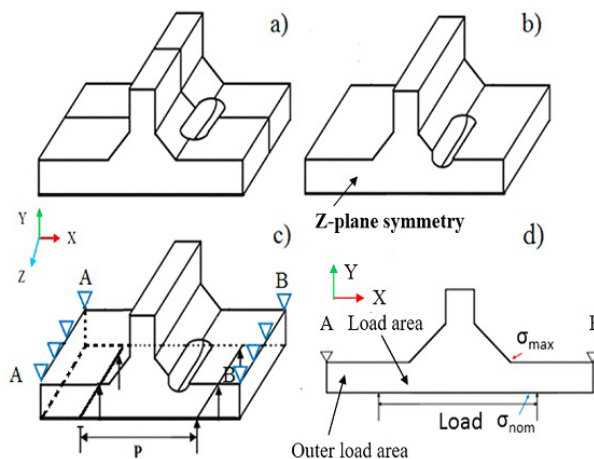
Scheme of the model. (a) U-shape grinding; (b) half of the T-welded connection with U-shape grinding; (c) load configuration and boundary conditions and; (d) σ_{max} and σ_{nom} .
